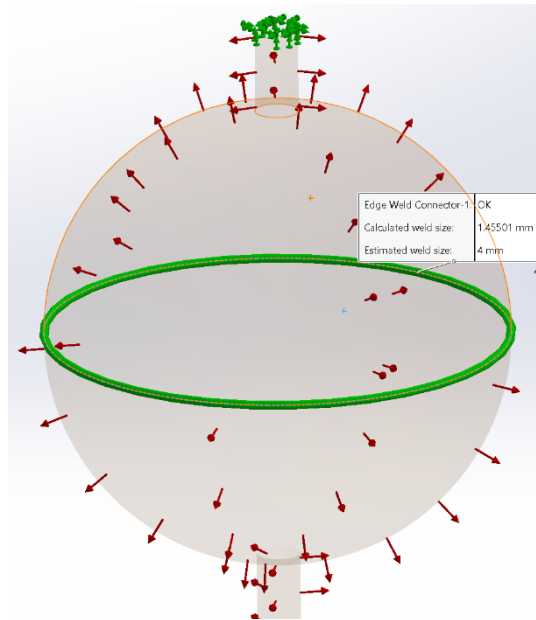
Traditional PV Weldment @ 590 PSI
